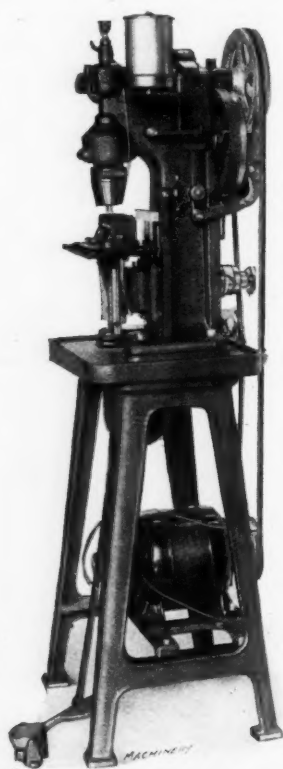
Side View of Langelier Tapping Machine showing Arrangement of Drive
